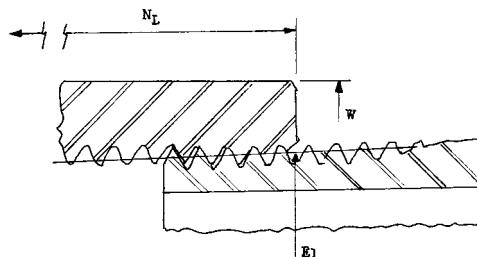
Nonrecessed Taper-Tapped Coupling and Pipe (See Table 3 for Coupling Dimensions)
